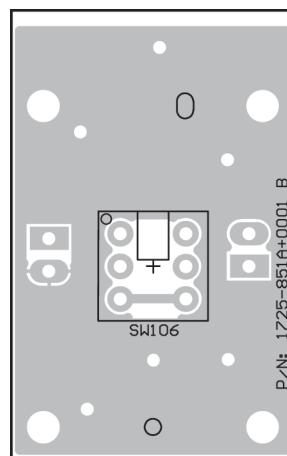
Standby Switch PCB Bottom Etch and Component Layout
